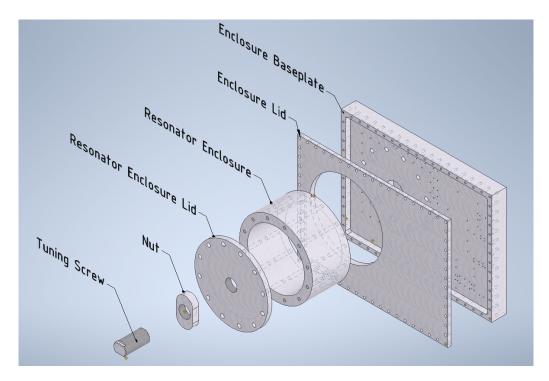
Autodesk Inventor drawing of metal enclosure.
